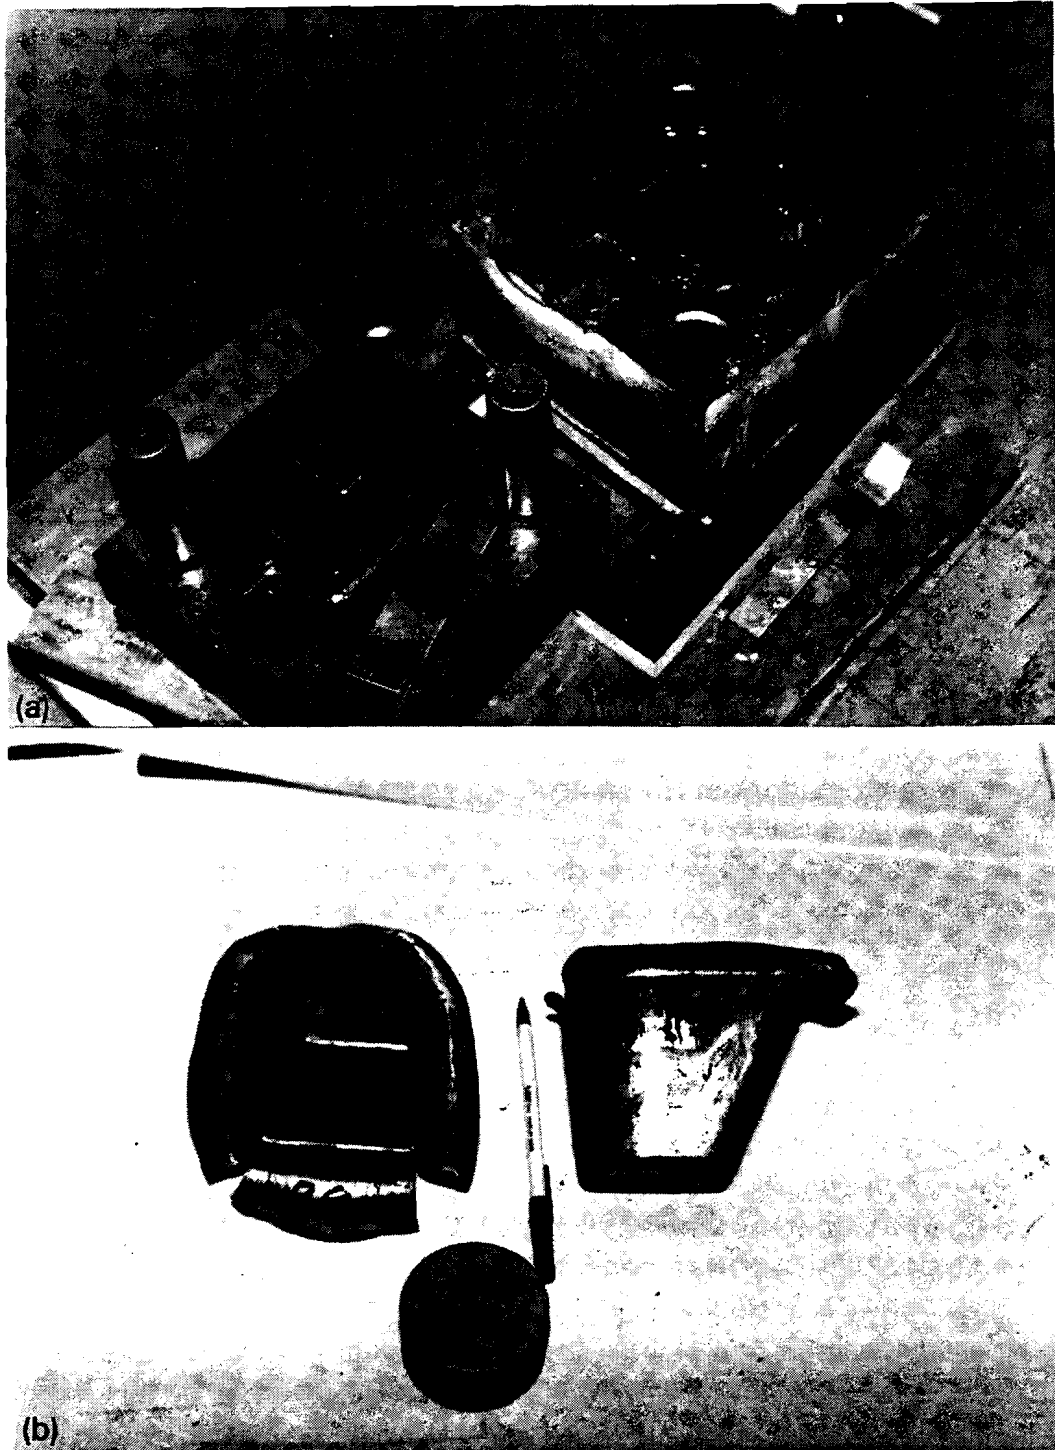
"Bucket" test: (a) tooling; (b) billet and final shape [1].
